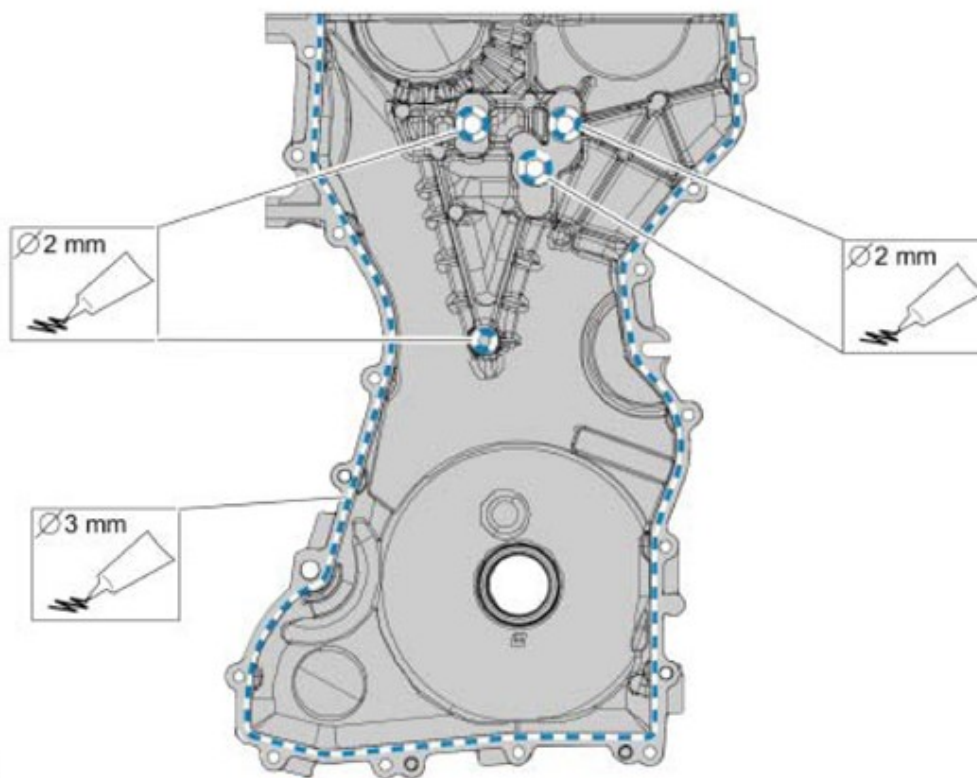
Applying Sealant On Mounting Surfaces Of Engine And Front Cover
